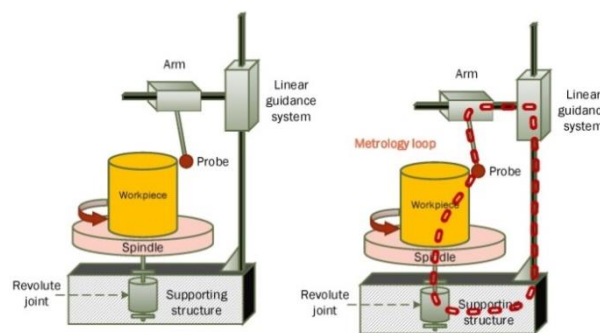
Architecture of conventional measuring machines for revolute parts; (left) working principle; (right) Metrology loop
